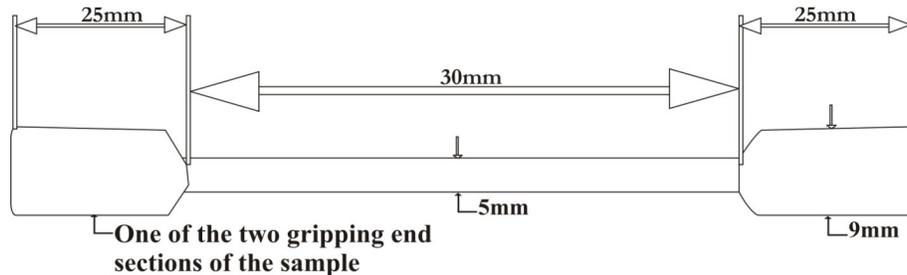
Dimensional specifications of the ASTM E-8 standard sample
